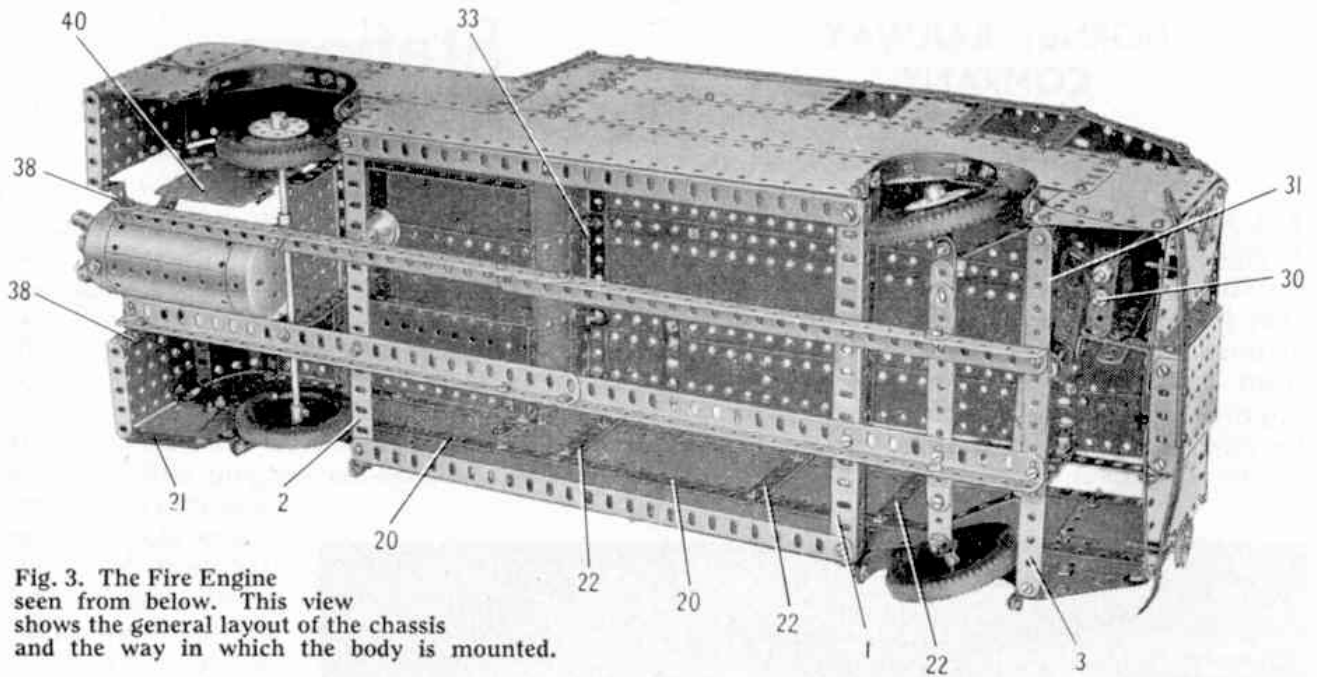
The Fire Engine seen from below. This view shows the general layout of the chassis and the way in which the body is mounted.
